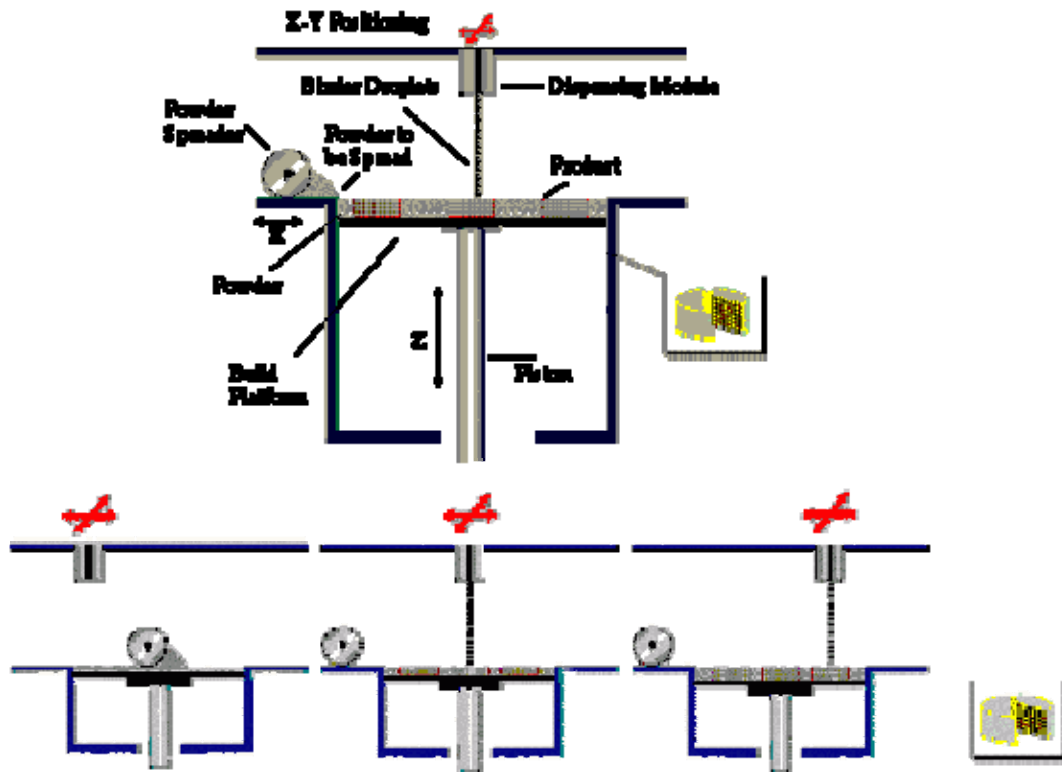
Schematic showing the operation of the 3DP Therics, Inc., machine. Layers of powdered material are laid down and bonded by printing nozzles on a piston. The piston moves down and another layer is deposited and bonded appropriately. The process is repeated layer by layer until the 3-dimensional product is produced.
